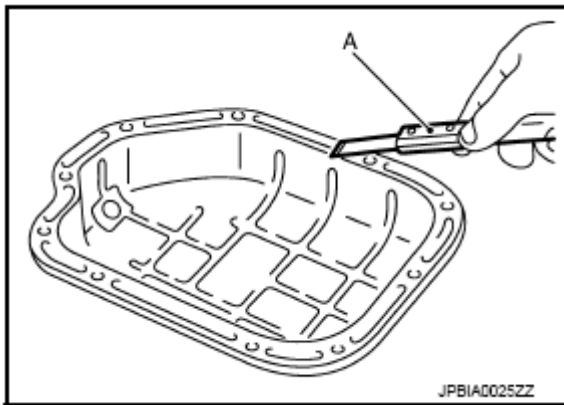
Removing Old Liquid Gasket From Mating Surfaces Using Scraper
